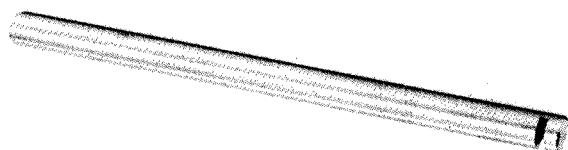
Correction jig (TEAC P/N 5736000100)
